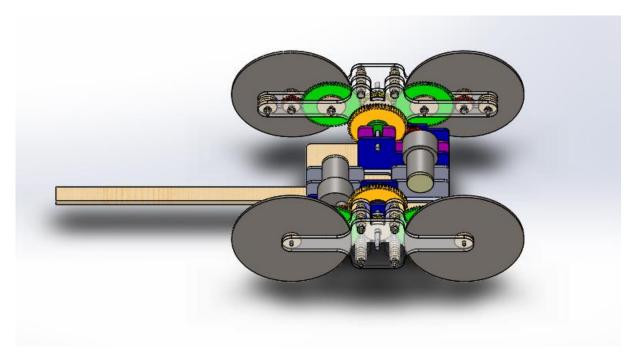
Raised side view of Mark 2 assembly (transparent gearbox upright to show gearbox gears).
